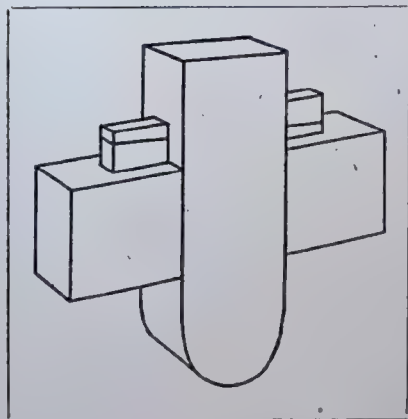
PERSPECTIVE SKETCH OF JOINT.
